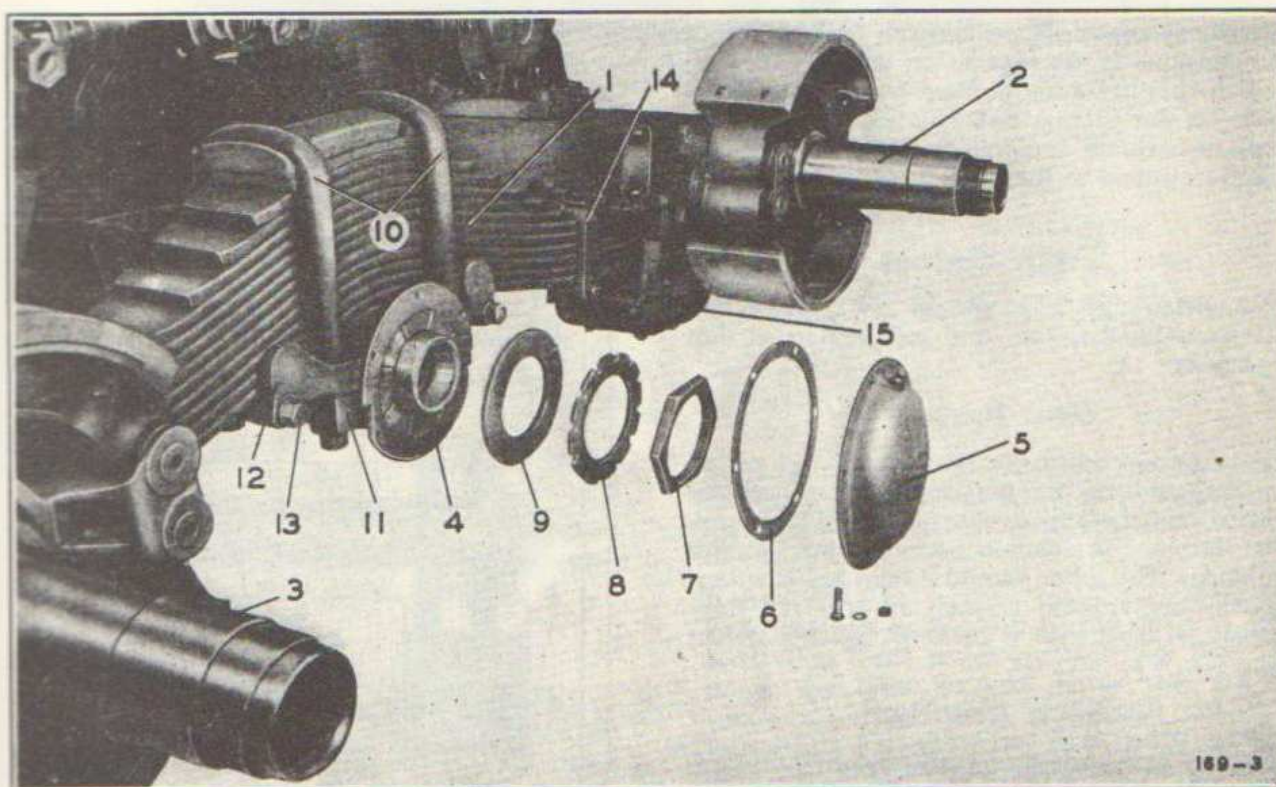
Rear Spring with Trunnion Journal Retaining Parts Removed so that Spring may slide off of Trunnion
